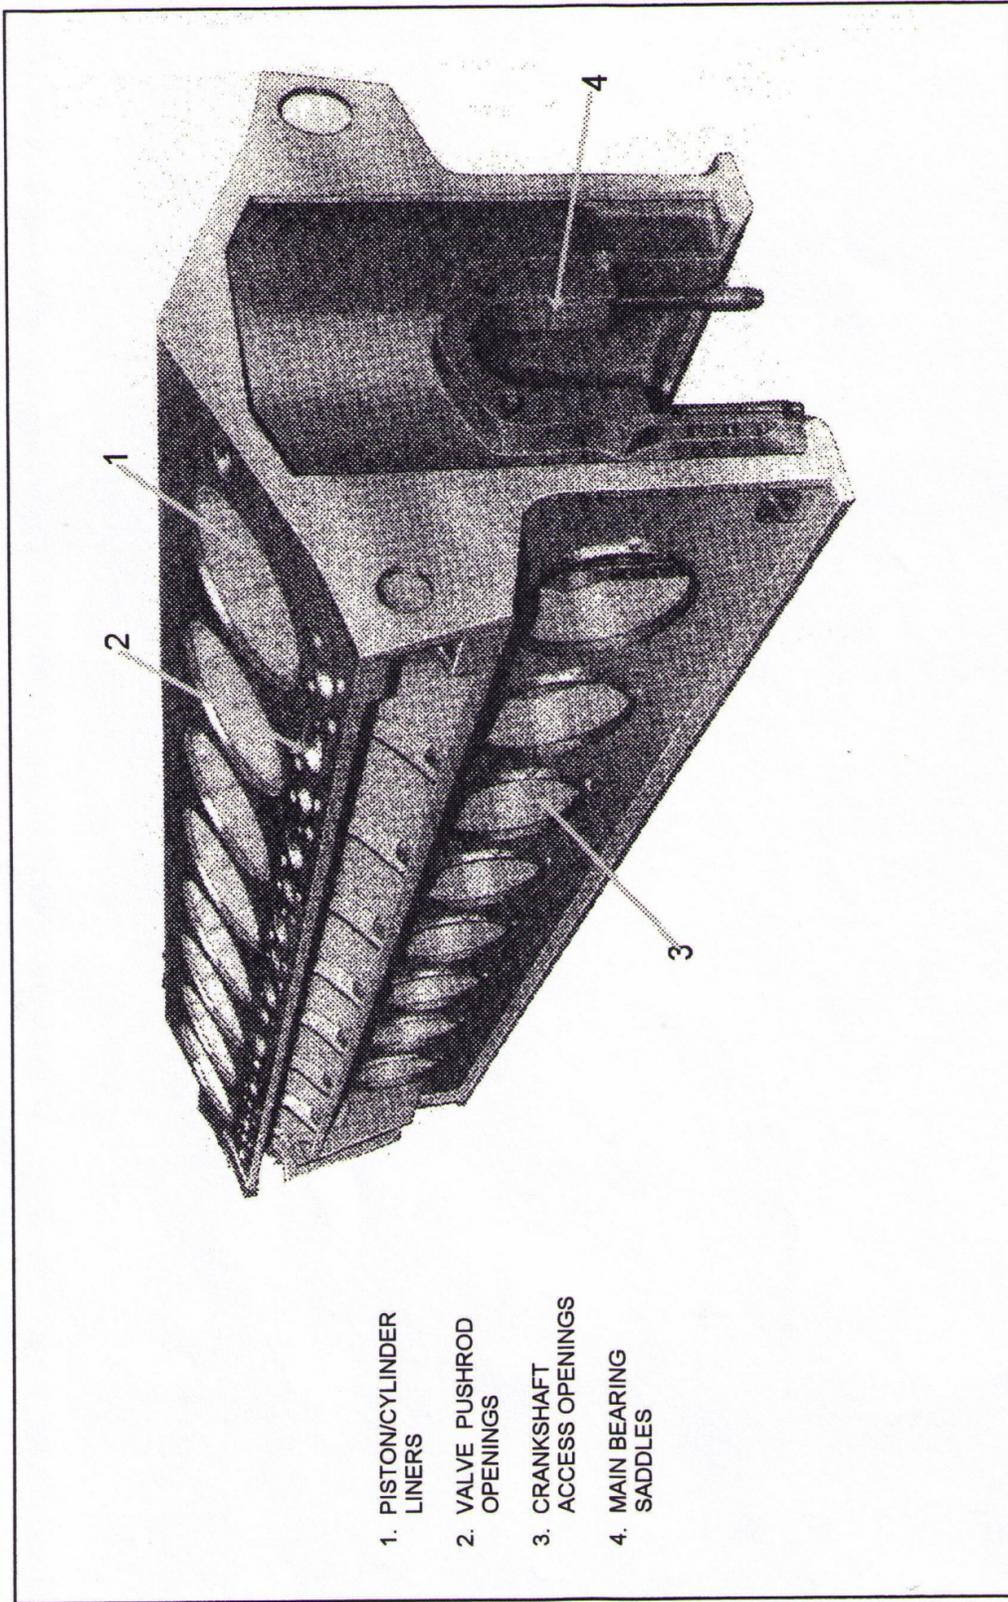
16-Cylinder PC Engine Cylinder Block
